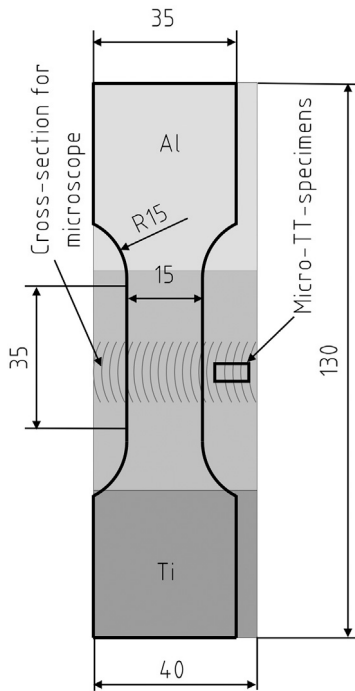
Overview of heat-treated sample with extraction areas of specimens and position of the weld seam. From each HT sample, one lap-shear specimen as well as 3 micro-TT specimens, see dimensions in Fig. 3, within the weld region were extracted. All dimensions in mm.
